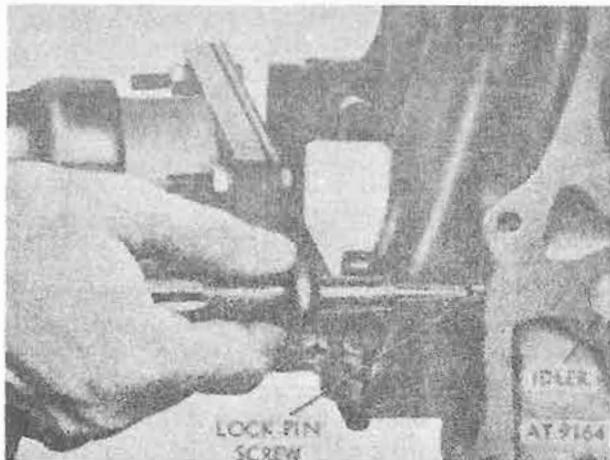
Countershaft and idler shaft lock-pin screw.
